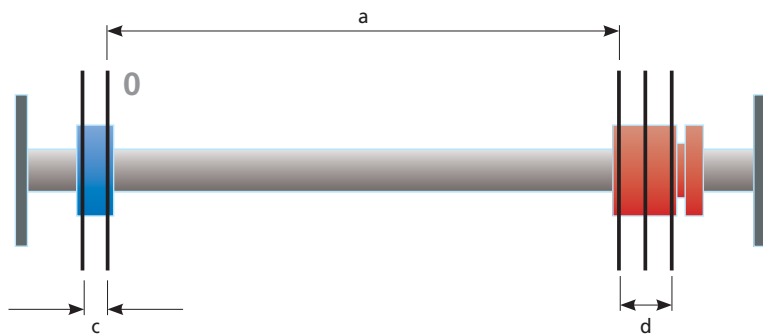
Movable saw configuration with one fixed and one movable saw bush
